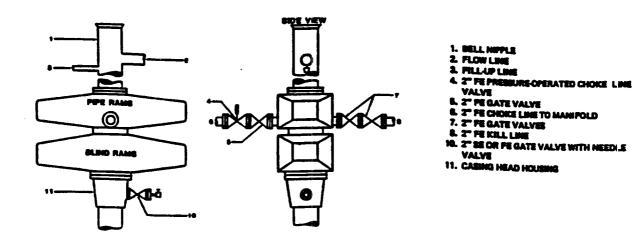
Standard Hydraulic Blowout Freventer Assembly 3 M Working Pressure Alternative 3 (without Drilling Spool)
